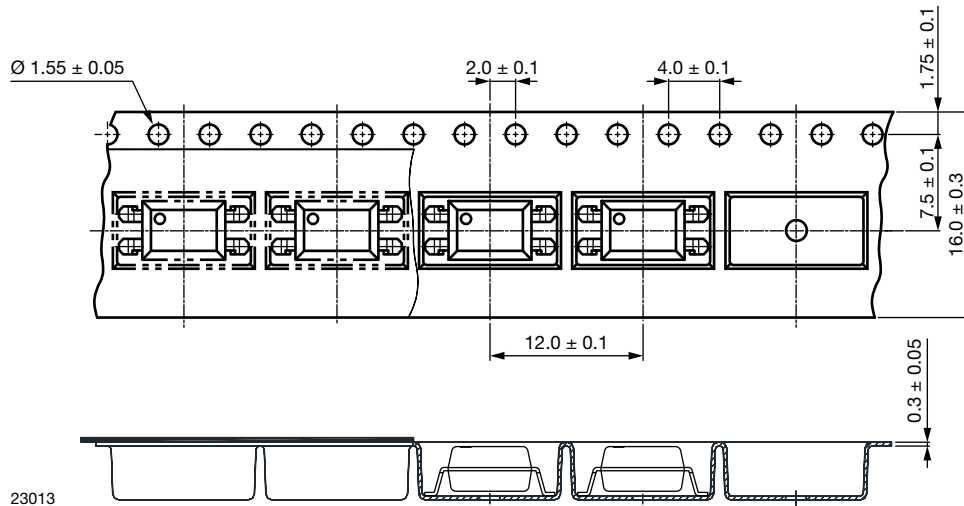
Tape and Reel Packaging (1000 pieces on reel)
